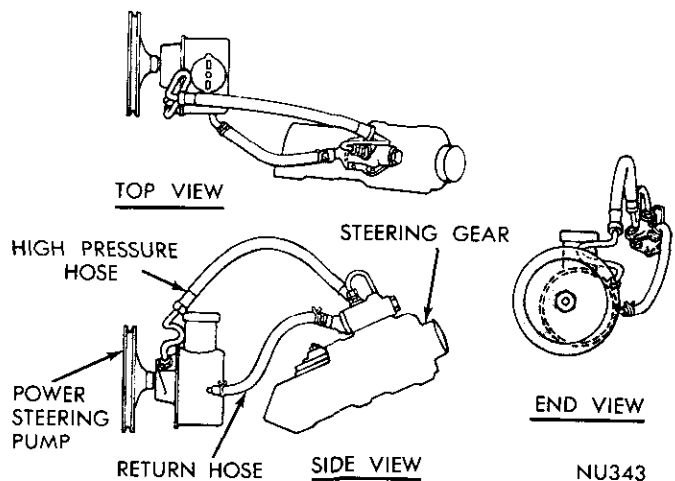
Hose Routing—1.06 Pump 6 Cylinder Engines
